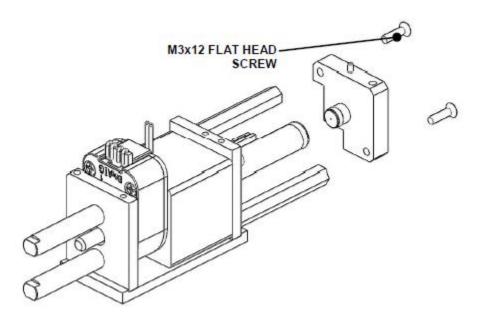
Sliding the Syringe Manifold into the Dispense Tube
